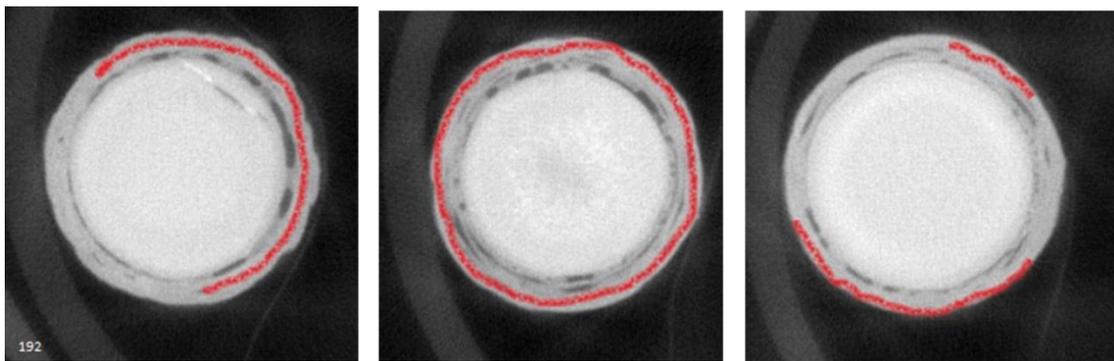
XCT analysis of GACE 1 (left), GACE 5 (middle), and GACE 8 (right) showing location of tube fracture (red line)
